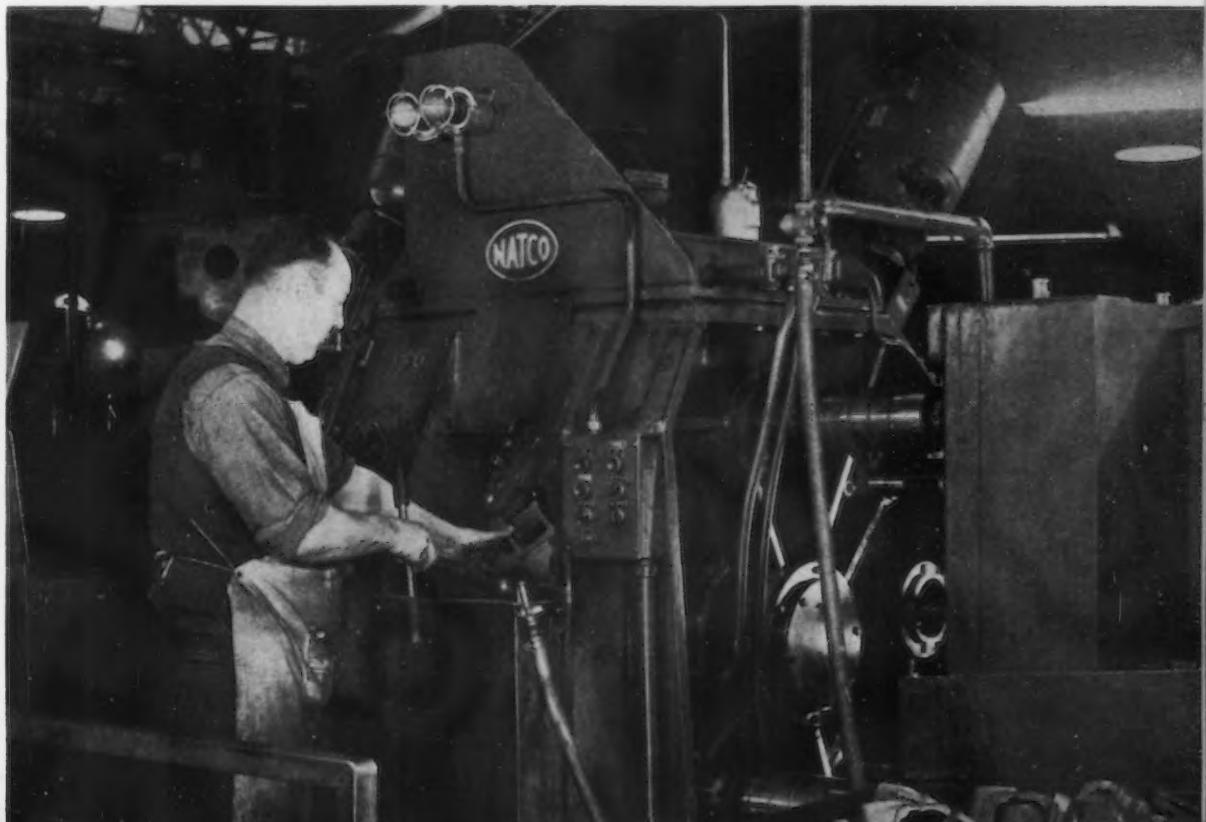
Closeup of the seven-station trunnion fixture support, showing the welded steel construction and the massive pilot guide roller bearings.
